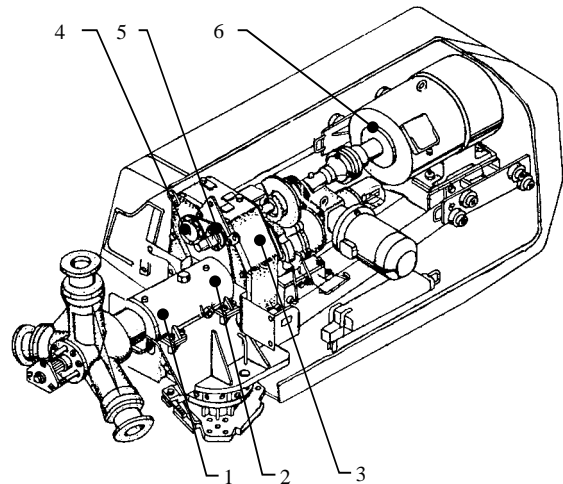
Places of transducers installation: 1) casing of main shaft in radial direction near bearing at the side of wind wheel hub; 2) casing of basic shaft in radial direction near bearing at the side of transmission; 3) casing of transmission near bearing of low rotating speed shaft in radial direction; 4) casing of transmission near bearing of middle rotating speed shaft in axial direction; 5) casing of transmission near bearing of high rotating speed shaft in axial direction; 6) casing of generator near working end of shaft in radial direction.
